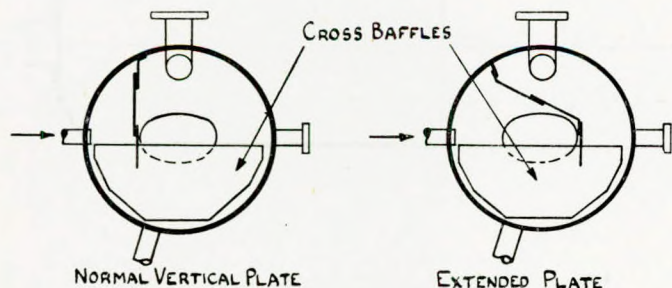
Typical arrangements of plate baffles fitted in sectional boilers.
